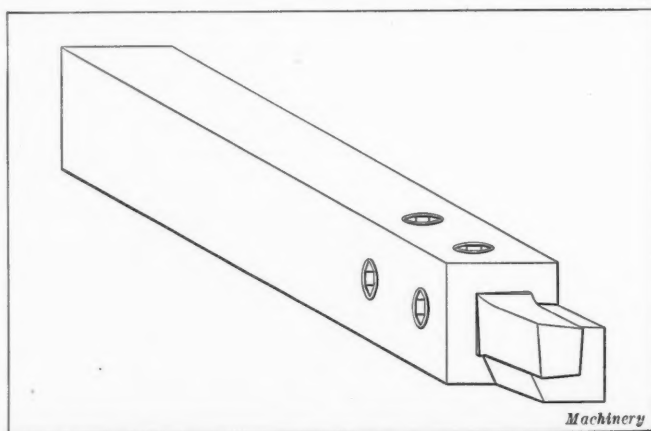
Scrapers for Flat Surfaces fitted into Handle shown in Fig. 2
